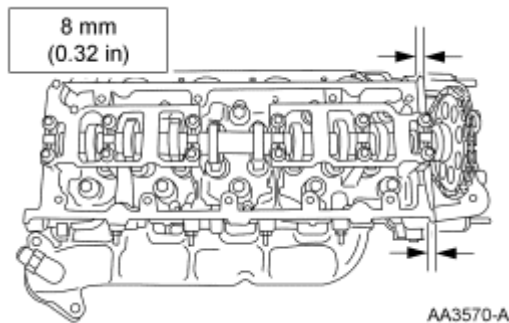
Applying Sealant At Engine Front Cover/Cylinder Head Surface (With Specifications)
